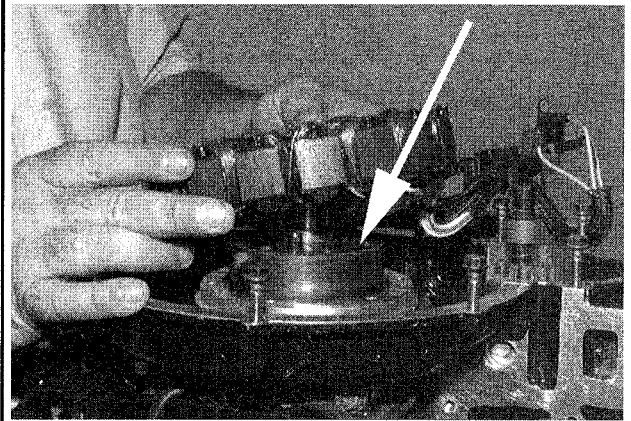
The sensor coil used on all 900 powerheads is also referred to as the sensor base assembly, as it is mounted under the flywheel and stator
